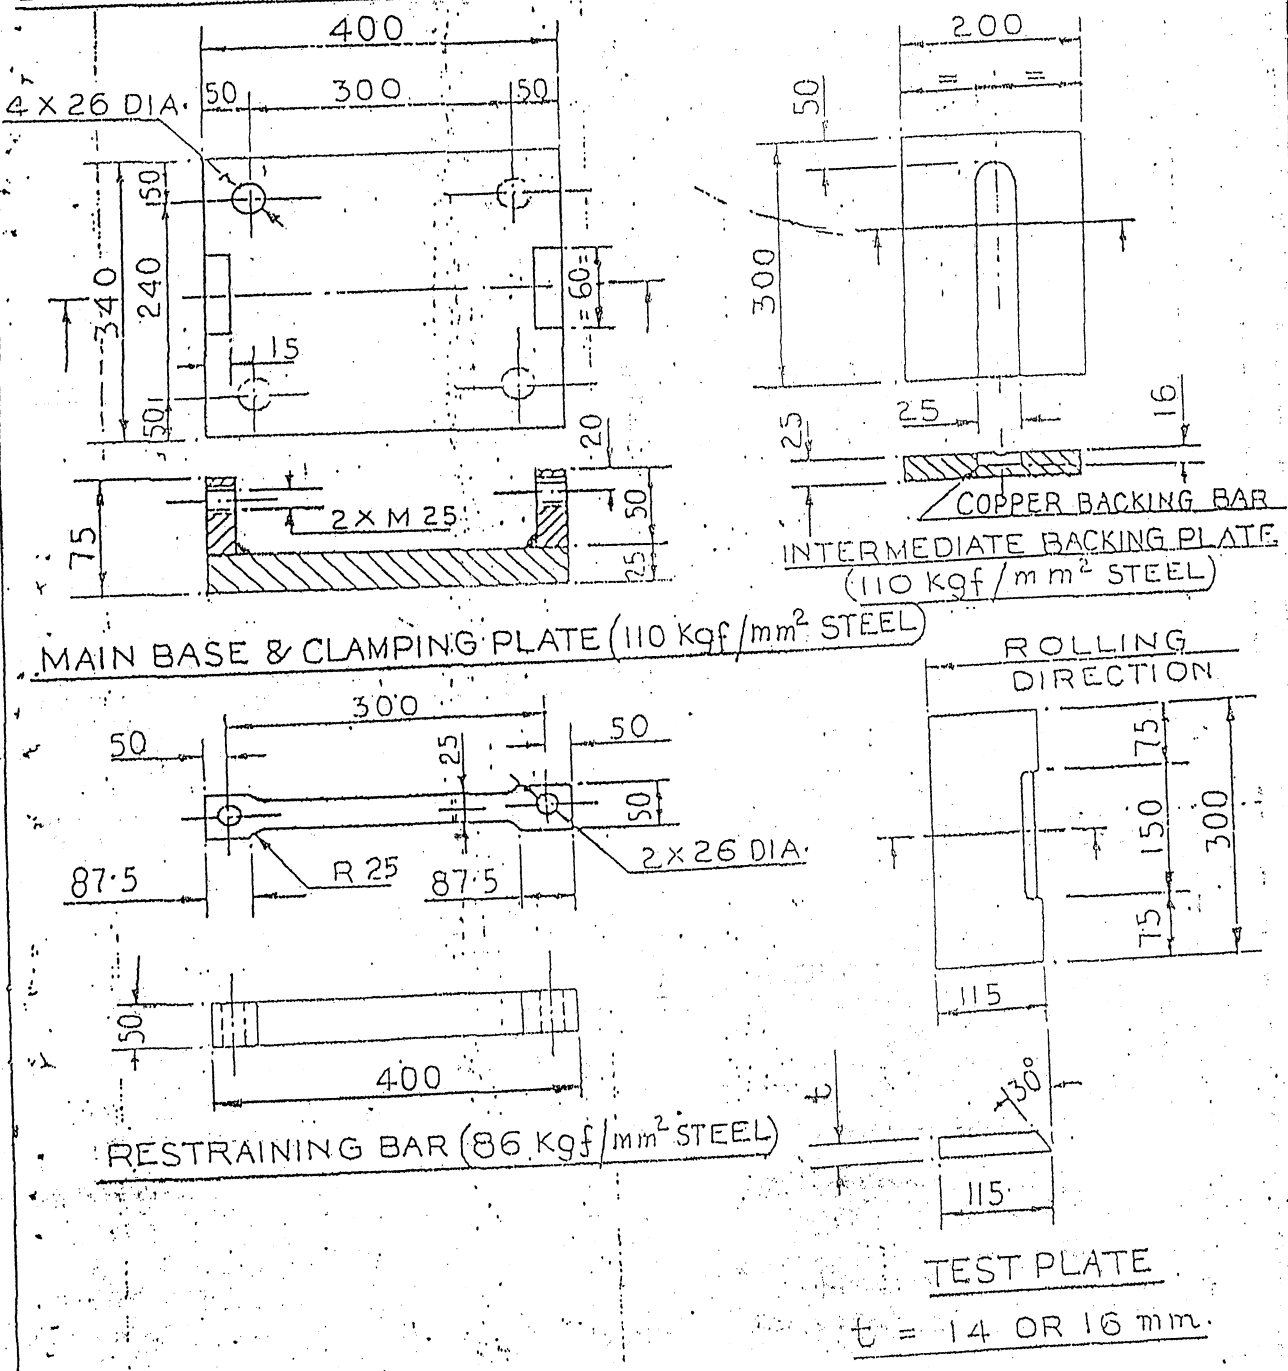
R. D. BUTT JOINT TEST ASSEMBLY
